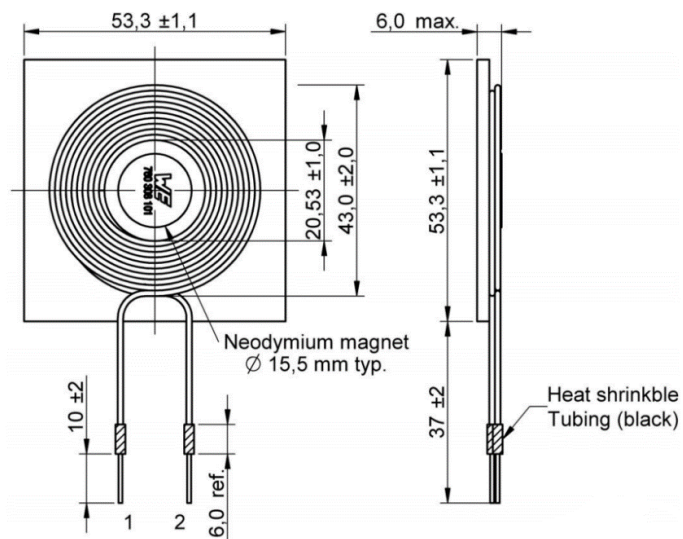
Dimensions of the secondary coil (mm) [77].
